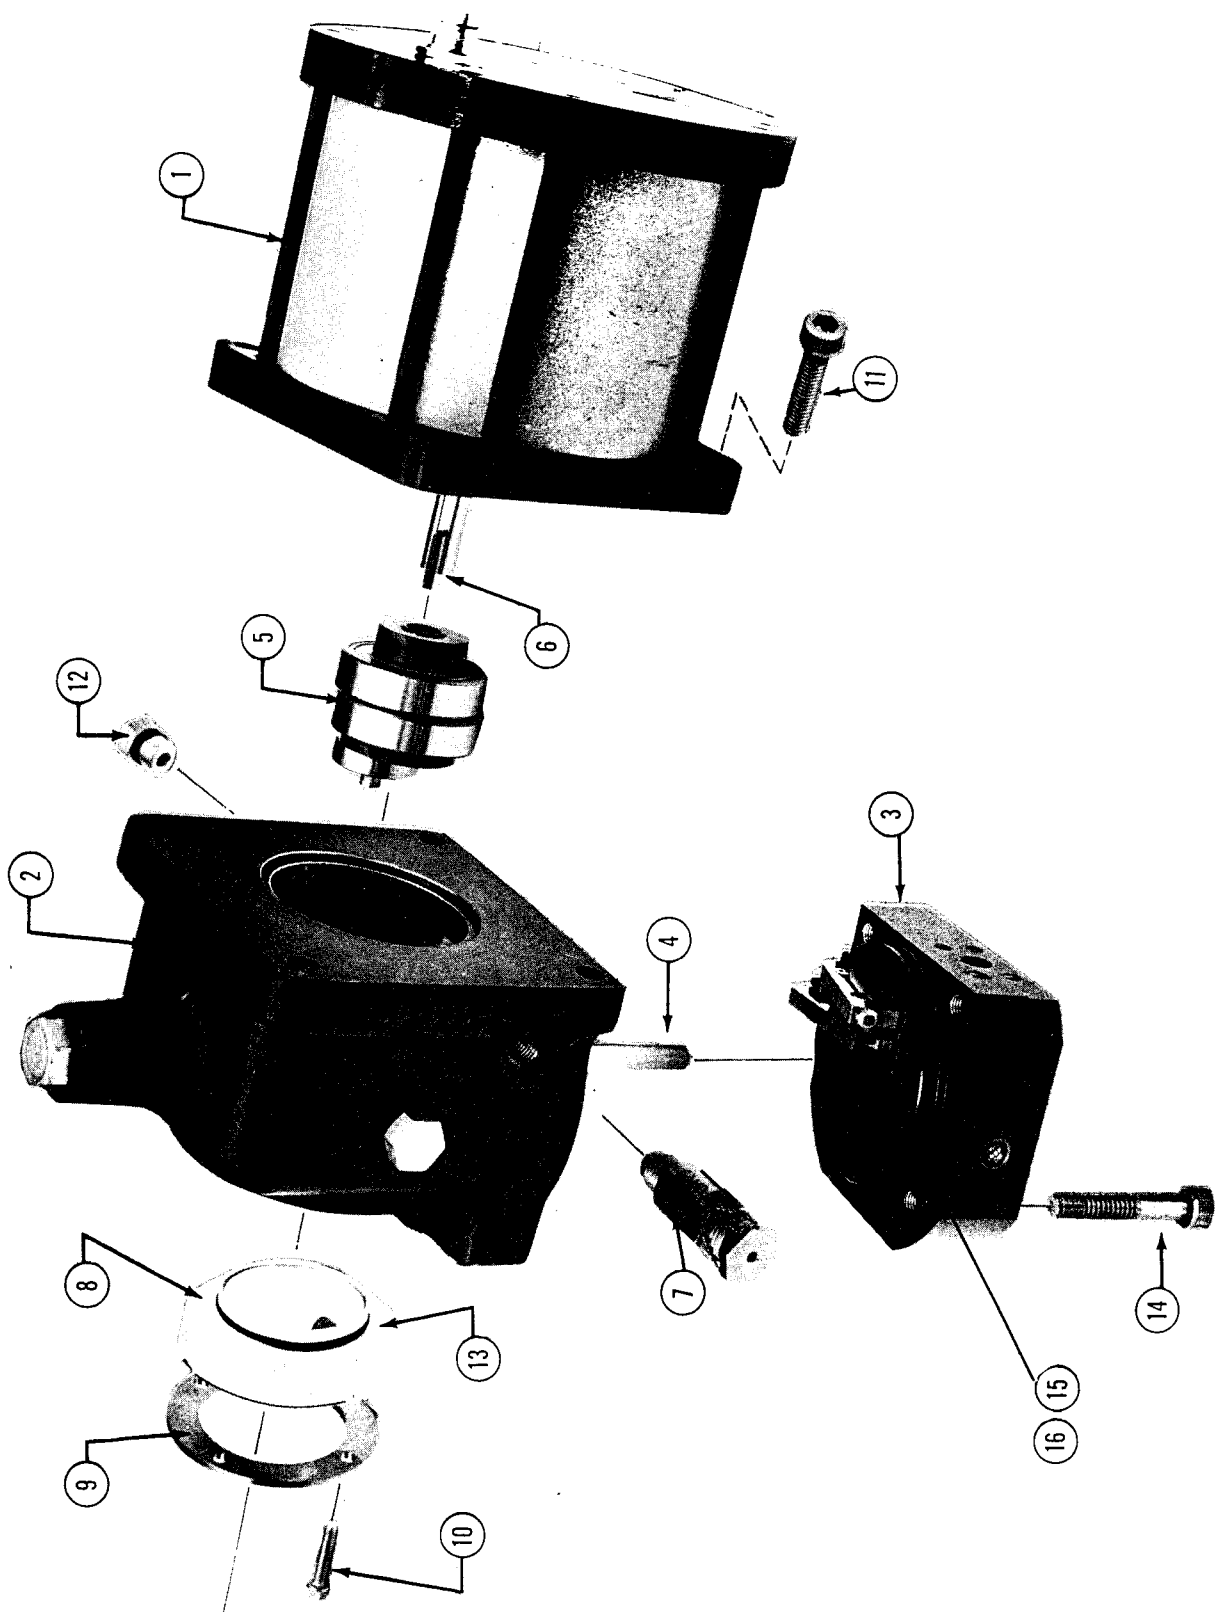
THE DRIVE UNIT, EXPLODED VIEW
